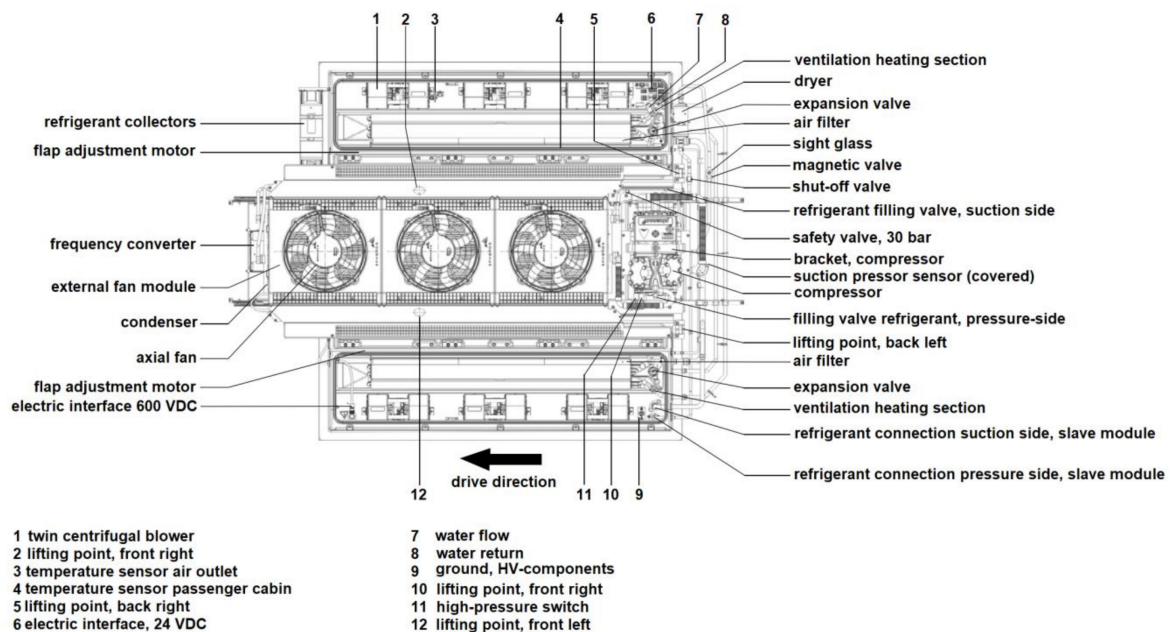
Detailed view of the assembly of the Revo-E heat pump from Valeo [38].
